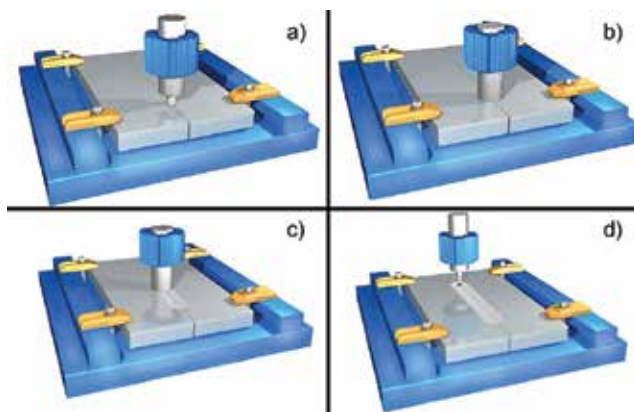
Scheme of FSW process steps: (a) rotating tool before plunging, (b) plunging and then tool shoulder touches the work piece surface producing frictional heat, (c) rotating tool traverses along the work piece and (d) pulling out from the workpiece.
